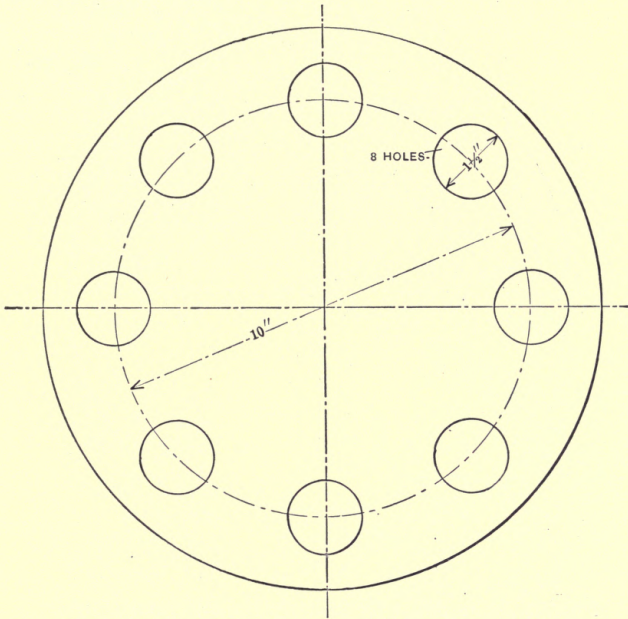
Dimensioning Holes Drilled in a Circle.
